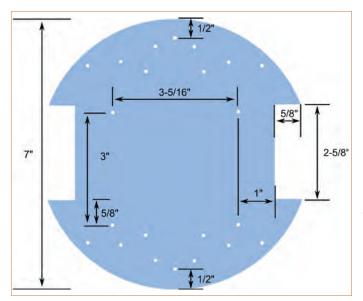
Layout pattern for cutting and drilling the bottom deck of the ArdBot. The only truly critical dimensions are the cutouts for the wheels and the placement of the two sets of holes immediately beside the wheel cutouts. These holes are for the servo mounts. See Figure 5 for a description of all holes.
